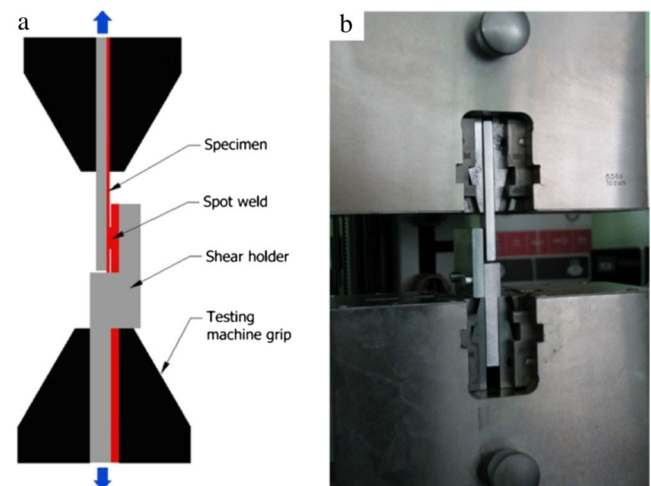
Scheme of fixing the specimen for the tensile/shear test (a) and view of real test fixture (b)
